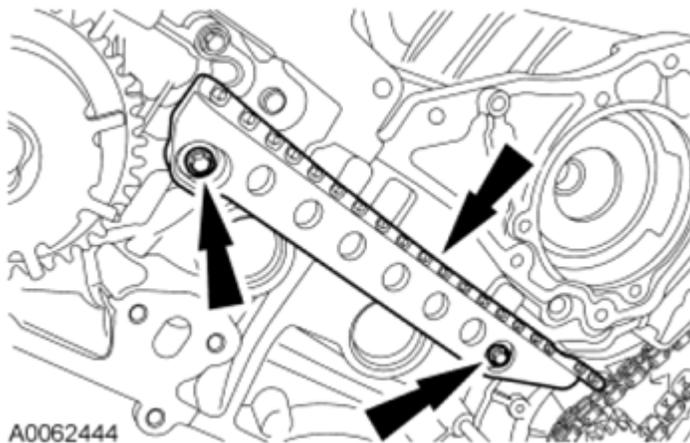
Locating Timing Chain Guide And Mounting Bolts
